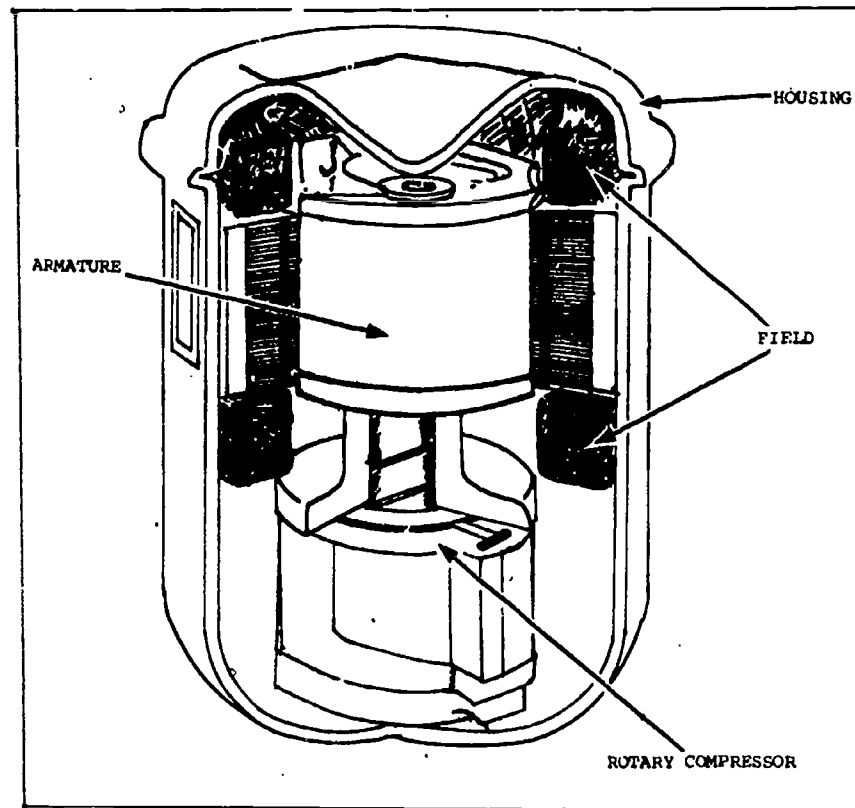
Cutaway of a hermetically sealed rotary compressor.
